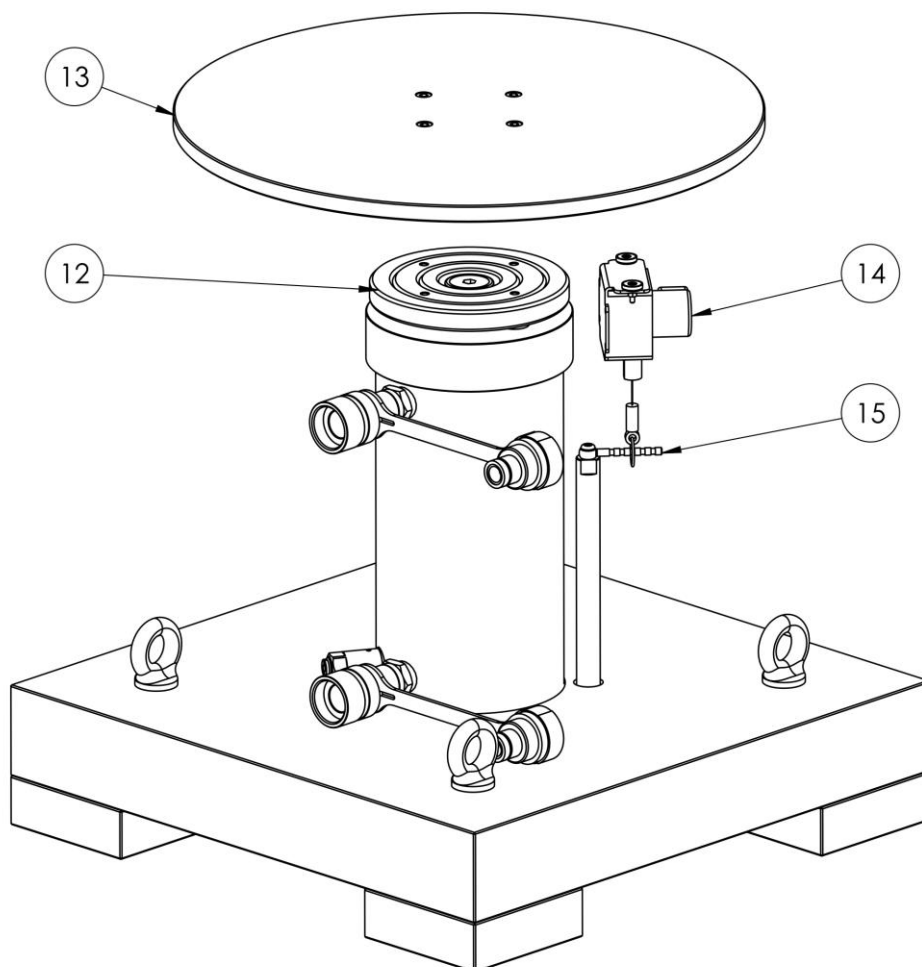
HCJ Climbing Jack with SLF/SLV Mounting Kit and Displacement Sensor Component Identification
